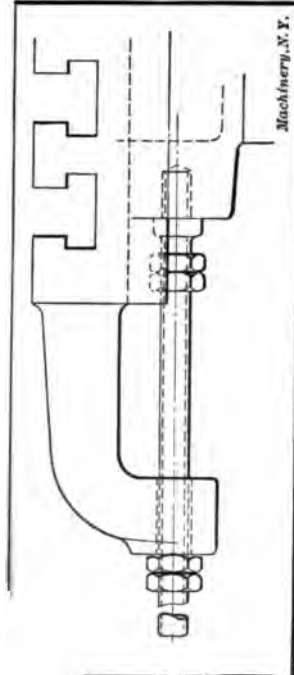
Efficient Type of Stop-rod for Turret Lathe Cross-slide
